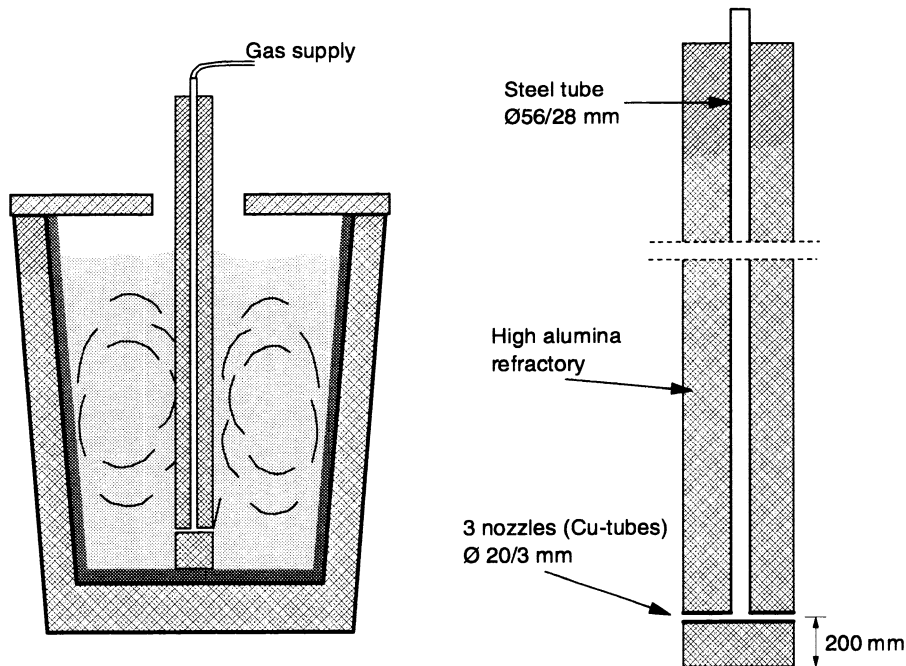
Experimental setup for centric ladle stirring with lance and principal drawing of refractory lance. The gas supply system was the same as for centric plug stirring experiments, cf. fig. 4.10.
